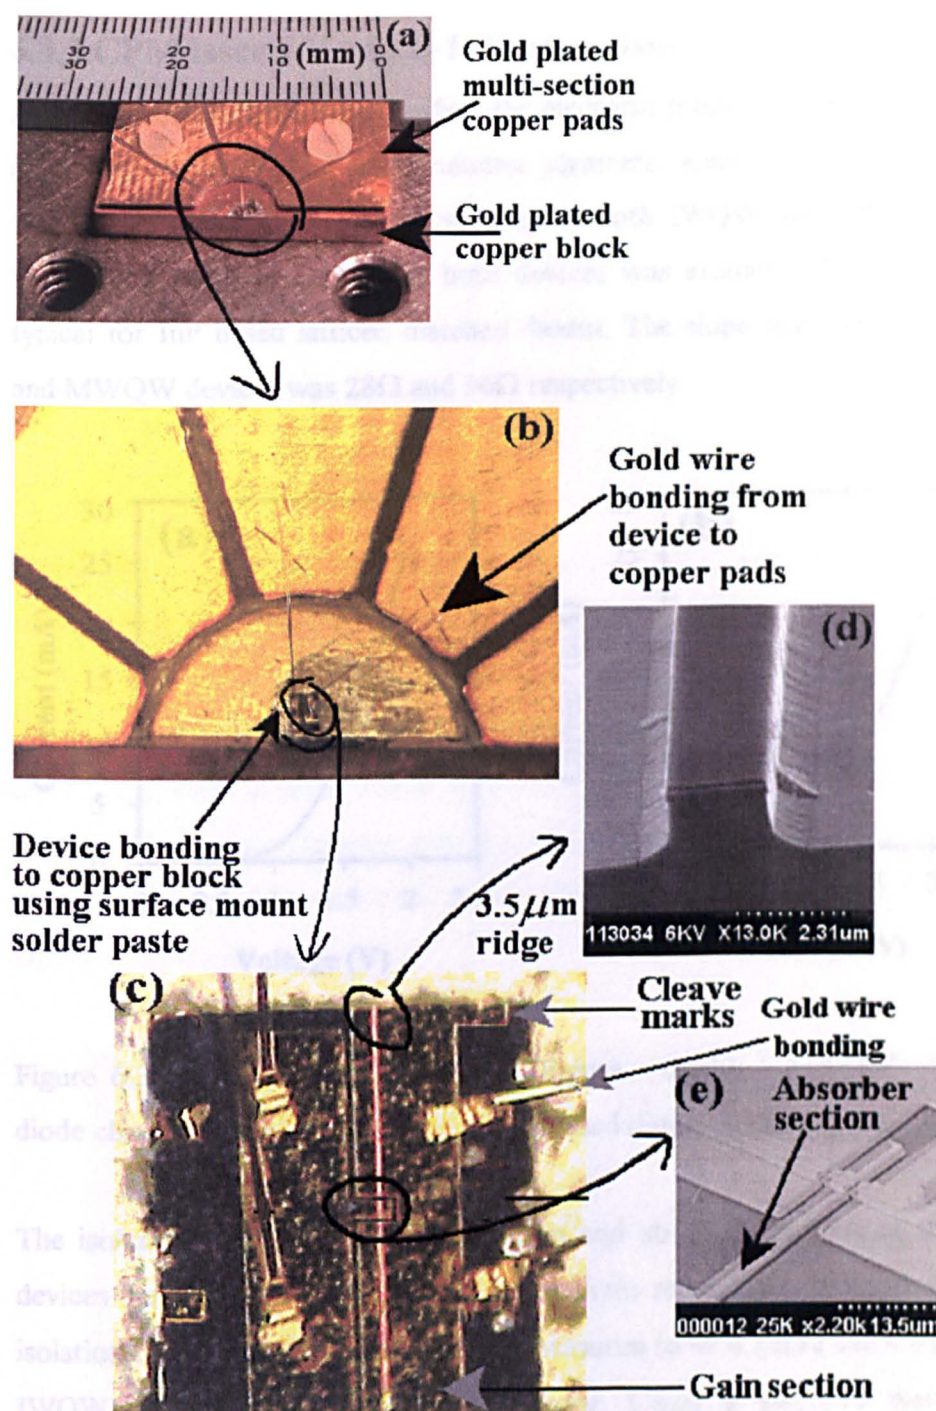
Photographs shown above are as follows: (a) far view of the mounted device on a copper block (b) wire bonding arrangement of the device to copper pads (c) close-up of the CPM laser diode (d) scanning electron microscopy (SEM) image of the 3.5 μm wide ridge (e) SEM of the absorber section
